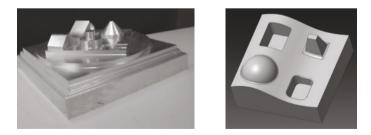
Machined NCG Benchmark Part [3.35] and Nisaform benchmark part
